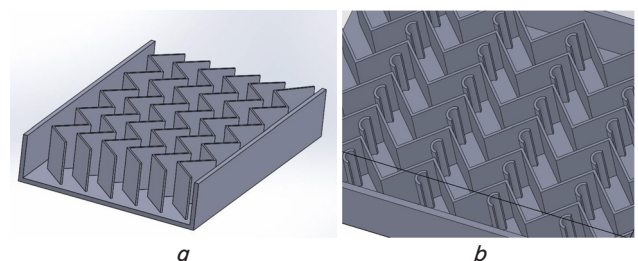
Separated part of the louvered element: a – classic-shaped louvered package; b – louvered package with c-shaped elements
